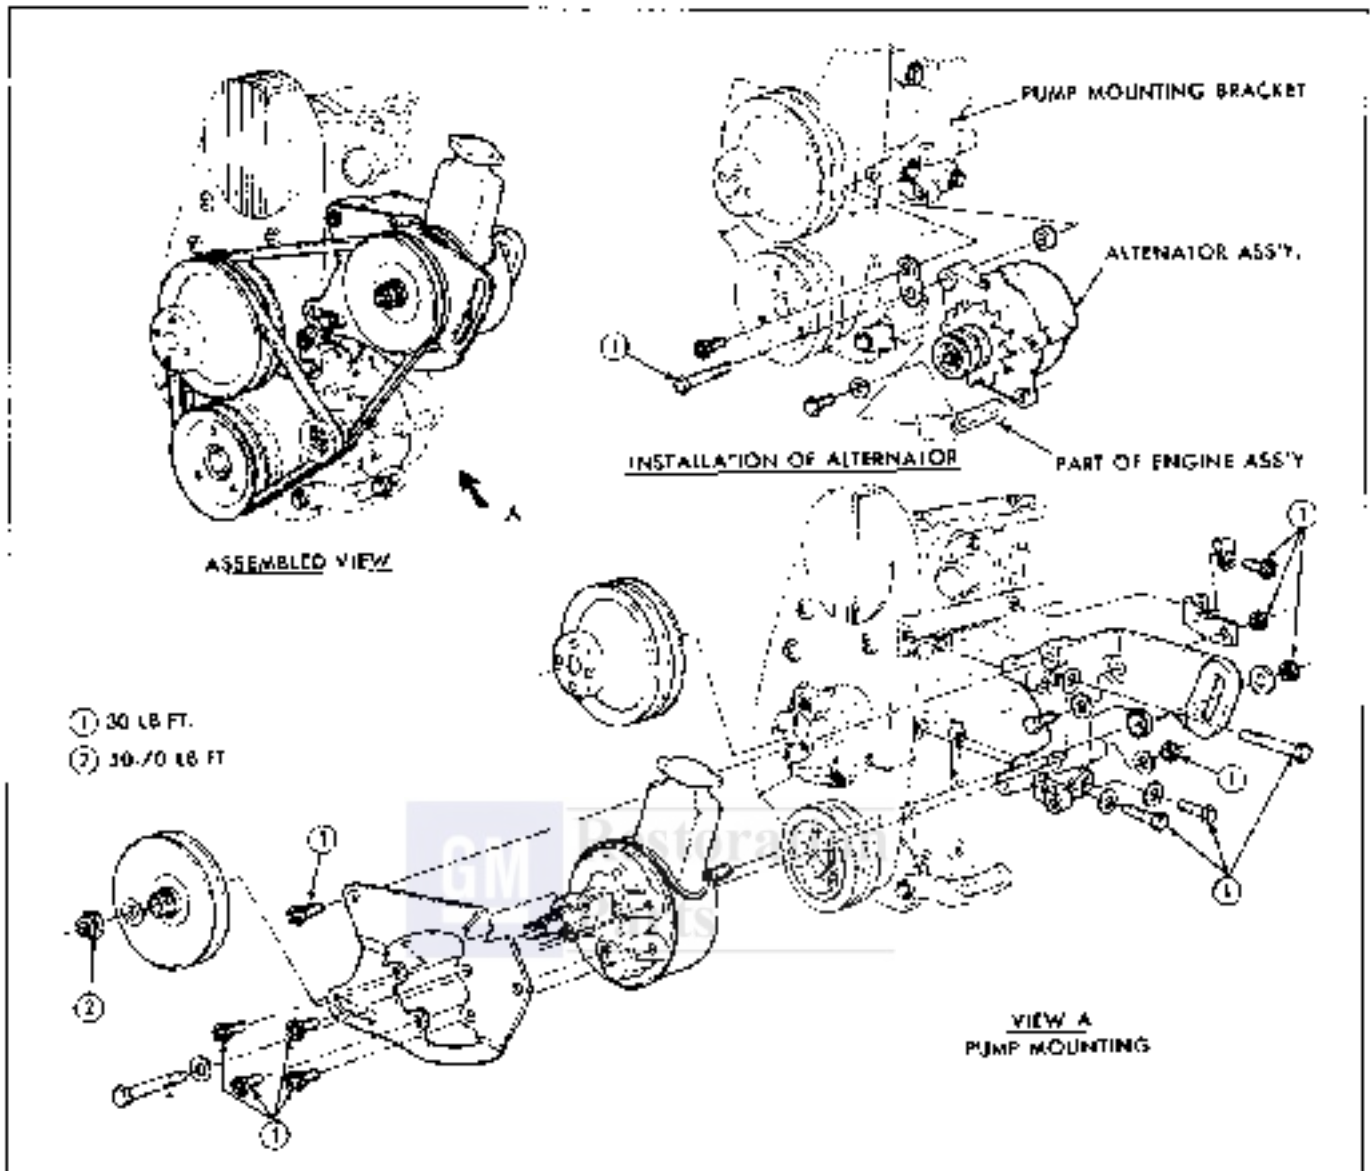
Installation of Power Steering Pump for 6 Cyl. Engines
